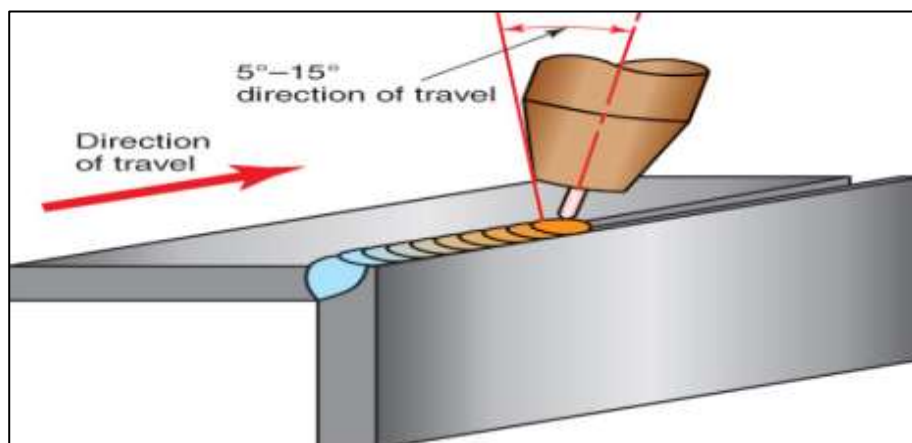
Flat Welding Position (Chen et al., 2013)
